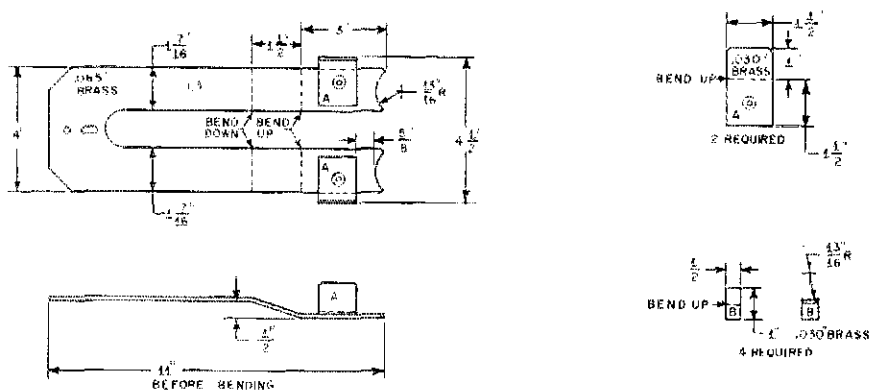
Flashing-copper parts used in the 2-meter amplifier. Broken lines indicate 90-degree bending required. The surfaces of the C4 rotor are soldered together after bending, for rigidity. The anode clamps, upper right, wrap around the tube cooling ring, and hold the brass tabs (Fig. 2) firmly in place. L1 and L4 are shown in the approximate shape, after bending, at the right.
